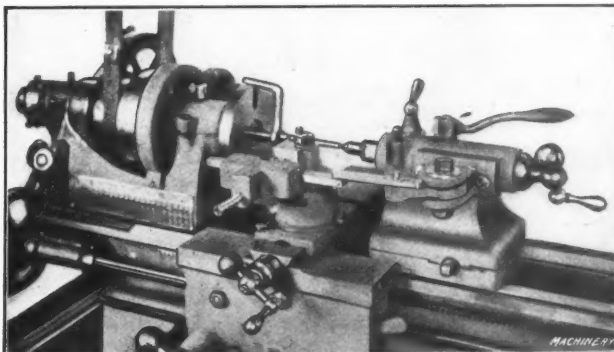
Townsend Taper Turning Attachment set up on a Lathe
